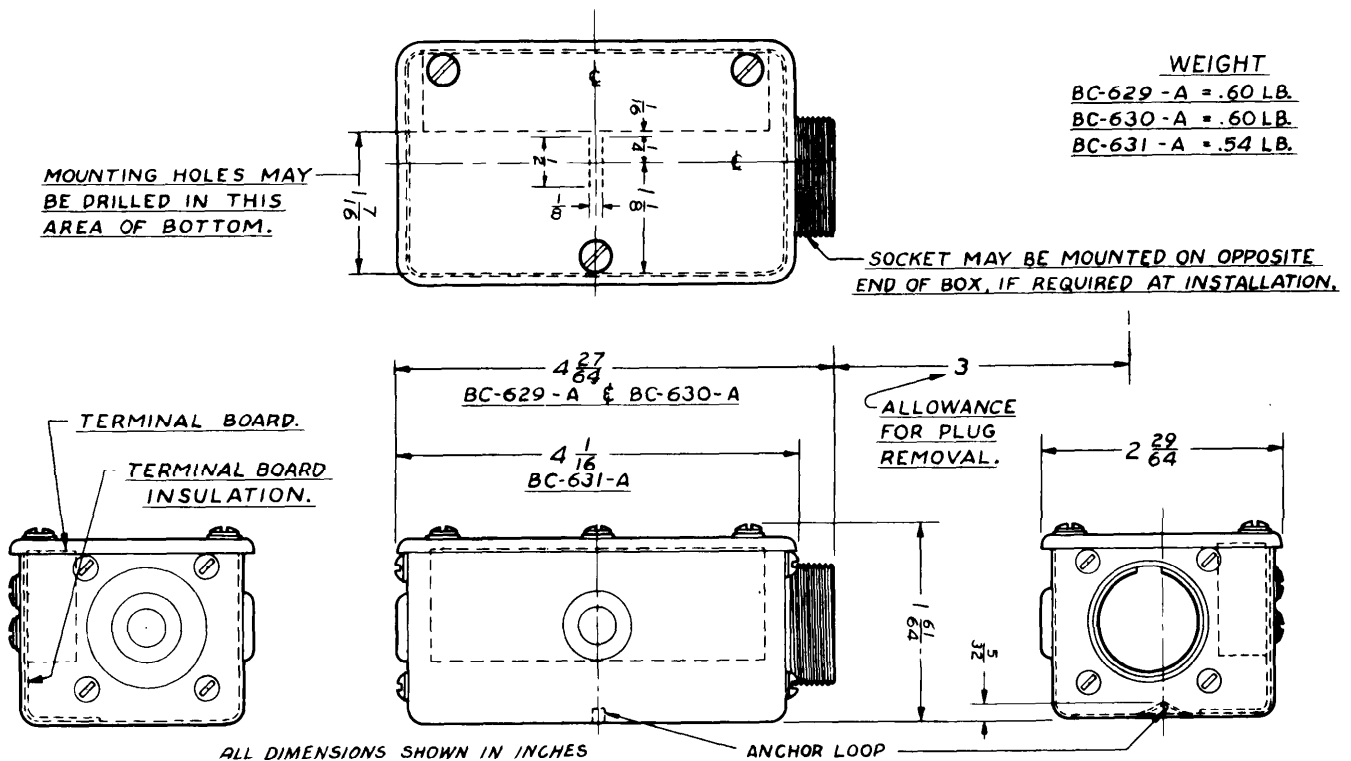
JACK BOXES BC-629-A, BC-630-A, AND BC-631-A, OUTLINE AND MOUNTING DIMENSIONS
